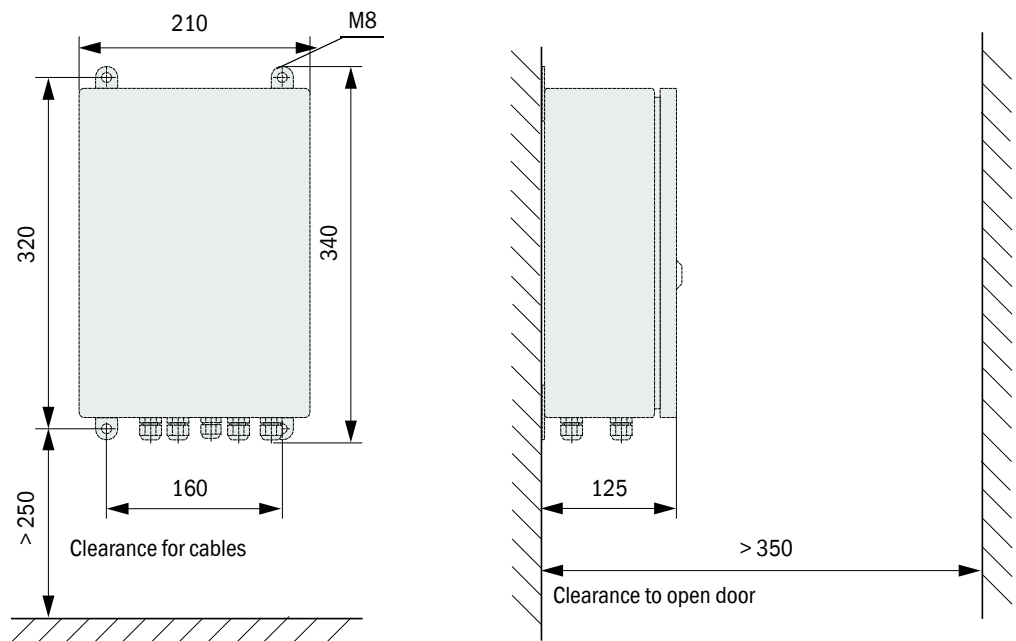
Assembly dimensions MCU (dimensions in mm)
